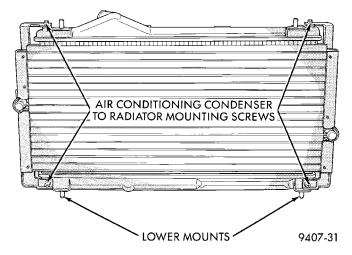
A/C Condenser to Radiator Mounting Screws INSTALLATION
